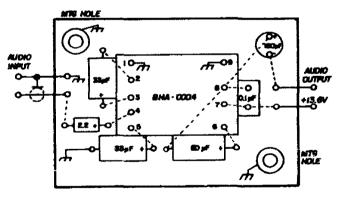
Suggested layout for a printed-circuit board (not to exact seals). The layout is very flexible and can be modified to suit the parts on hand.
